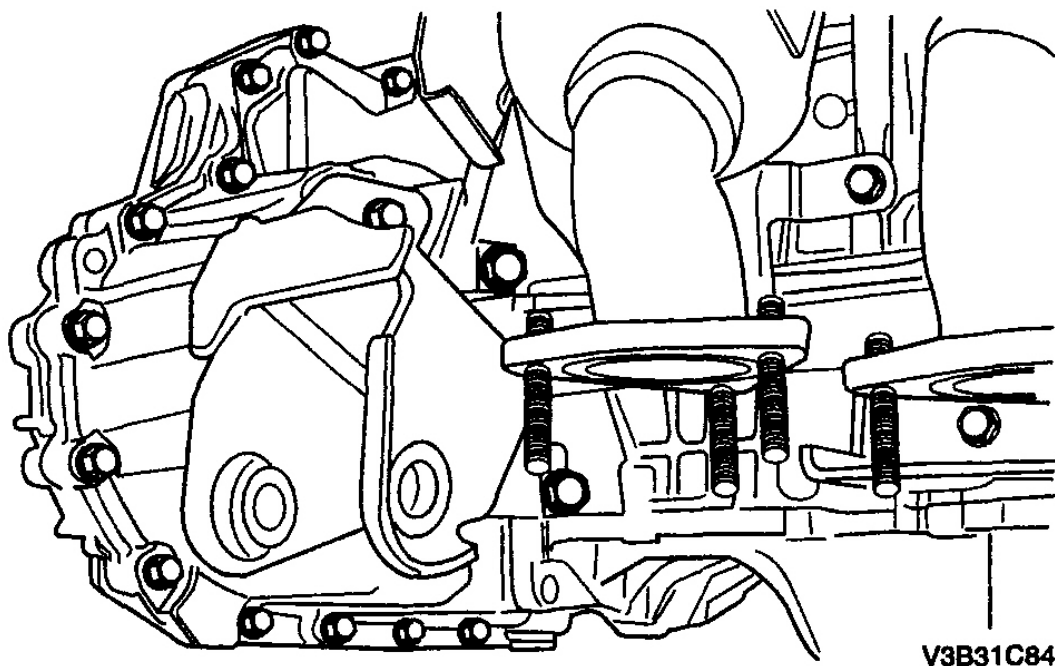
Tightening Engine Block-To-Transaxle Bolts
